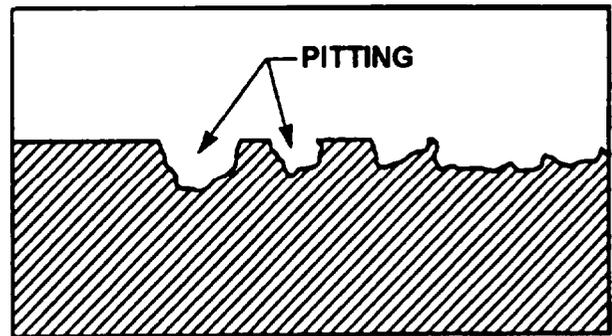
(b). Pitting corrosion (magnified cross section).
